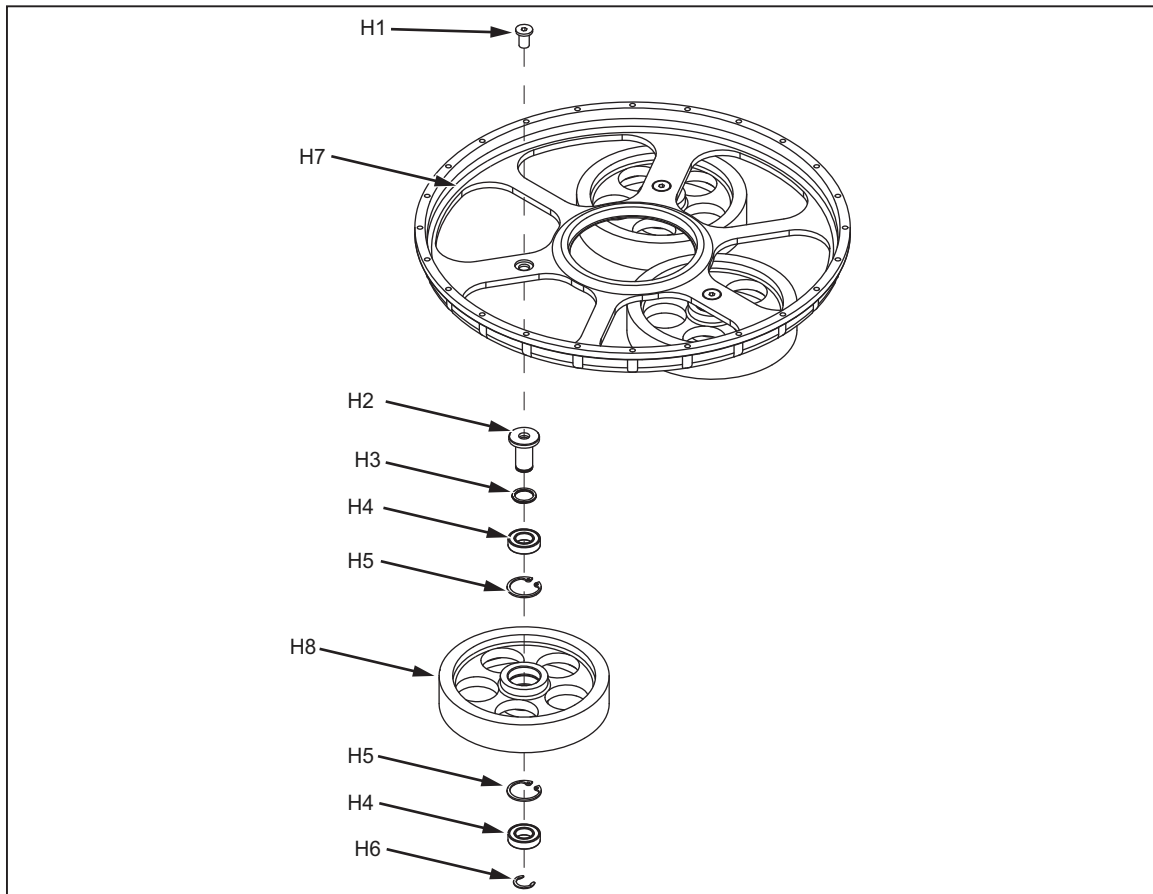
A2/A3 Cam Plate and Planetary Gears Assembly
